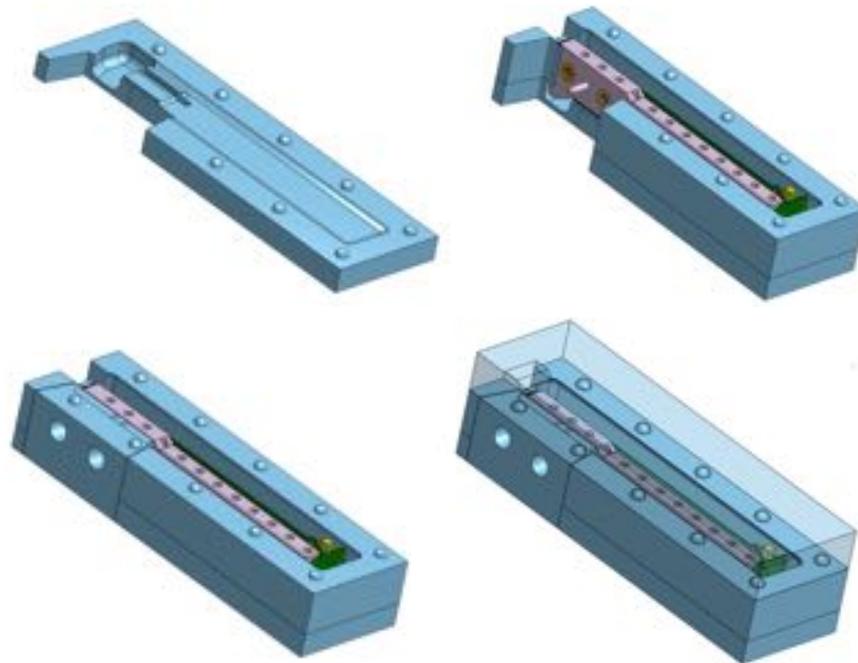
Four part mold assembly. Semi-spheres facilitate alignment. Mold parts are stacked horizontally. A groove in the bottom piece acts as a placeholder for the part of the PCB where a 5-pin header can be connected. The gripper attaches to a vertical insert via two screws, preventing PDMS to penetrate the area where the structure is mounted to the gripper. PDMS is poured into an opening in the horizontal mid-section.
